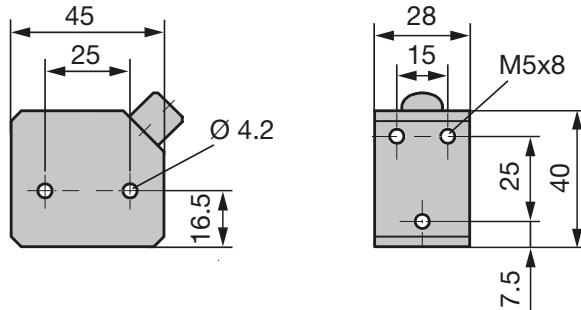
Installation dimensions of BTL5-P-4500-1 magnet
